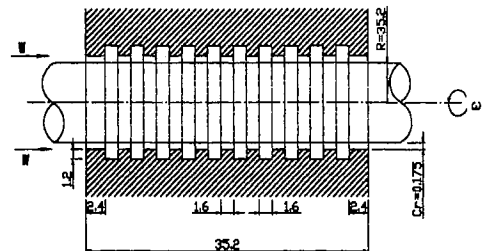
Geometry of circumferentially grooved seal (Unit : mm)
